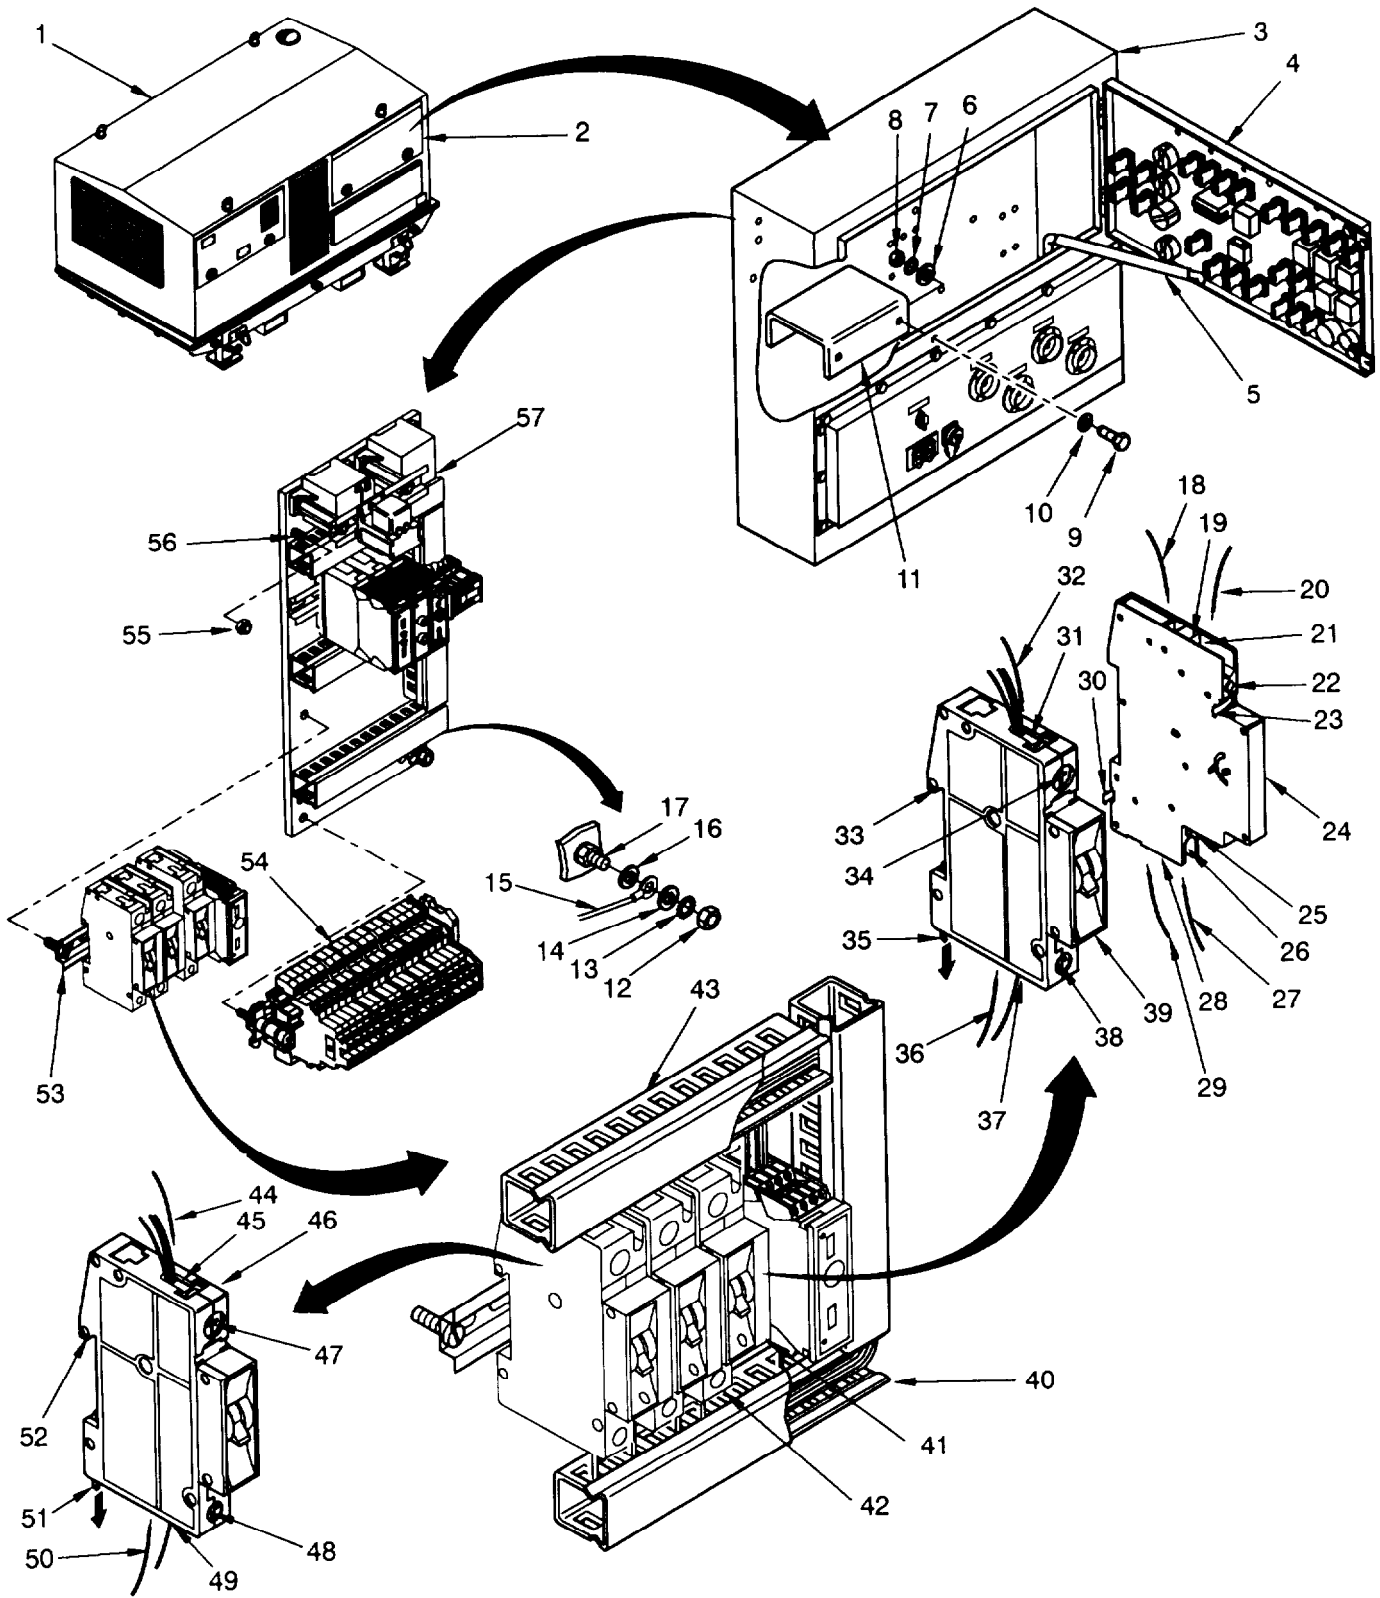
Control Cabinet Assembly, Engine Preheating Control Board, Circuit Breaker Maintenance.
